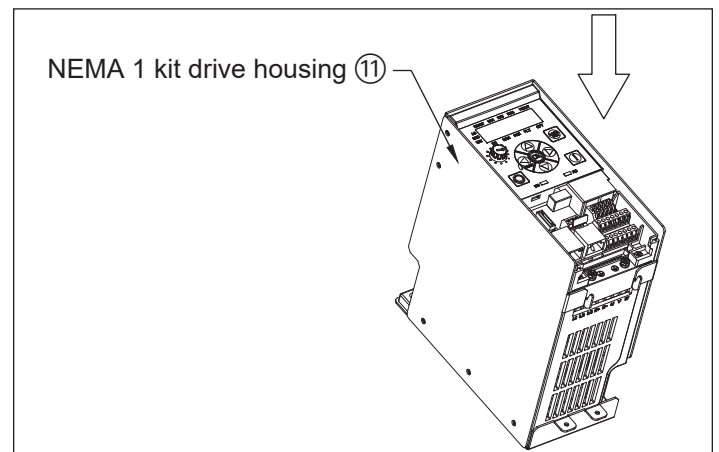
Inserting the drive into the metal NEMA 1 drive housing.
